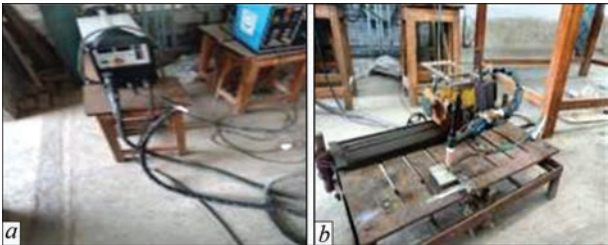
Welding machine (*a*), travelling vehicle (*b*)
